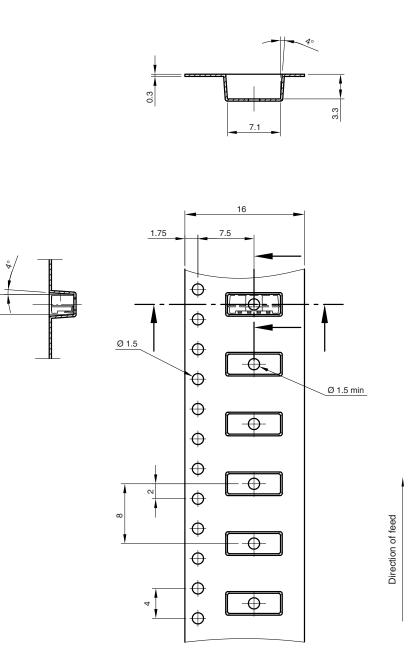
Issue: 1; 16.10.08 21577
